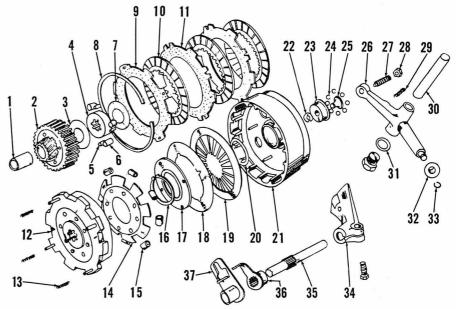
Exploded view of automatic clutch used on HM/S model.
